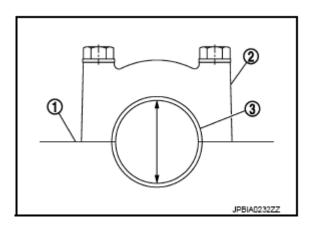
Identifying Main Bearing Oil Clearance Courtesy of NISSAN NORTH AMERICA, INC.
